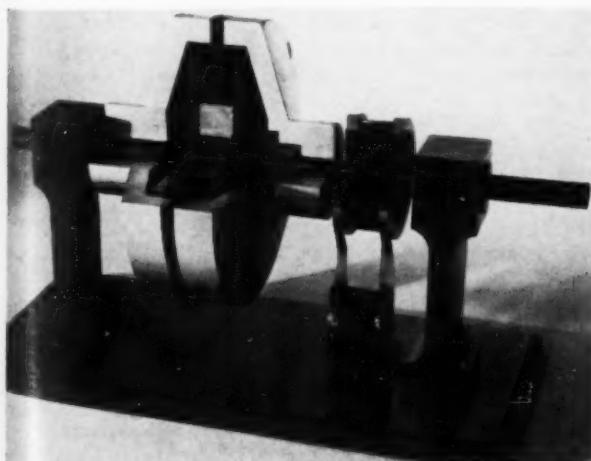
CUTAWAY MODEL OF A SIMPLE MULTIPLE-DISK-TYPE MAGNETIC FLUID CLUTCH
